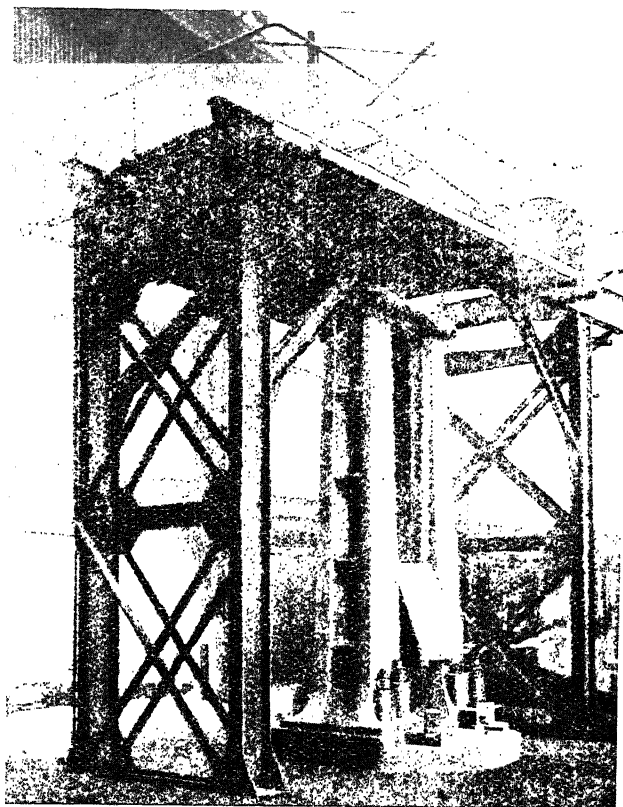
A LARGE DROP STAMP USED FOR FORGING
